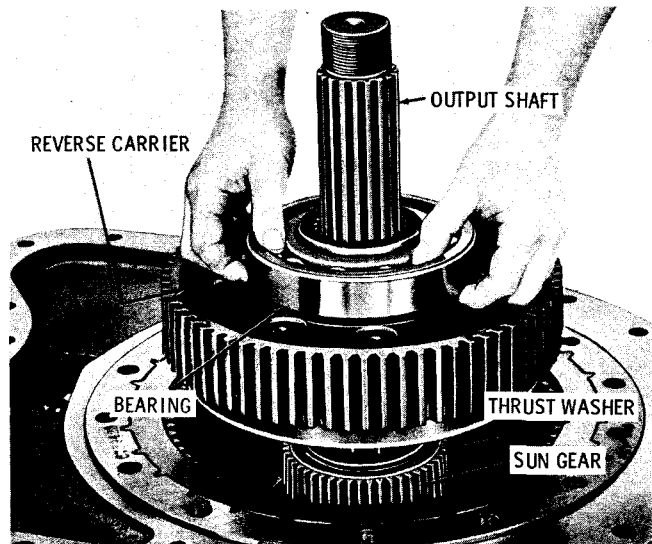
Removing reverse-range planetary carrier and bearing
